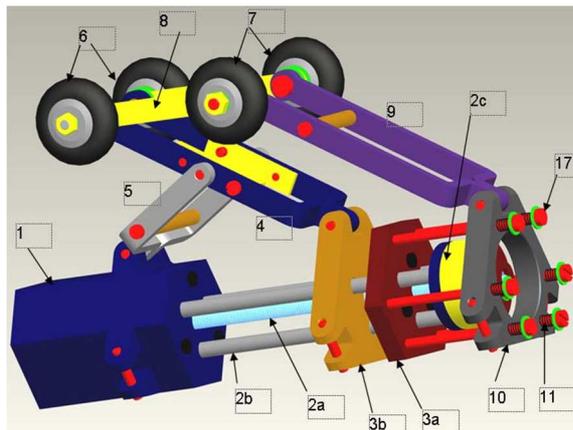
Opening and closing of the arm of wheeled machine with adjustable wheels CEREVKA
